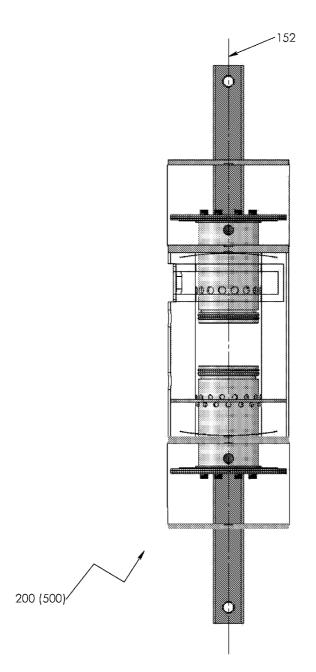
E. SIDE, CROSS-SECTIONAL VIEW OF COMBUSTION ASSEMBLY DURING ENGINE CYCLE
